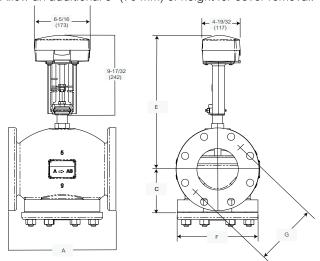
M1500A Series U-Bolt-style with Flanged 2-Way Globe Valves
